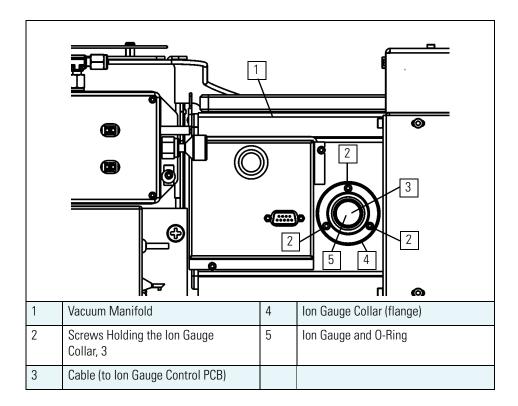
Ion Gauge (Left Side of Vacuum Manifold)
